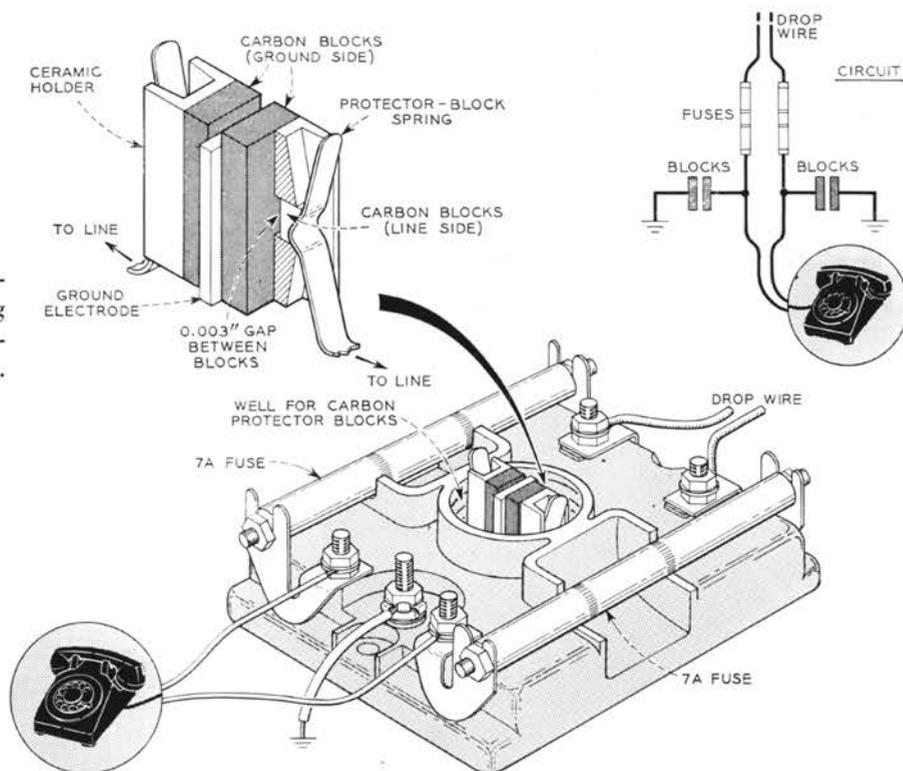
The 98A protector, with details showing circuit schematic and assembly of carbon blocks.
